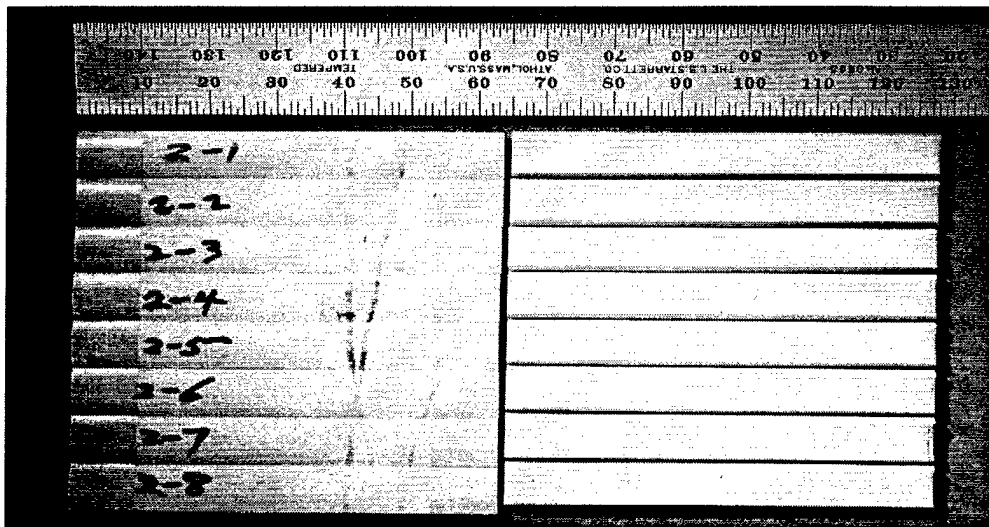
B Sixteen segments prepared using diamond saw cutting.
